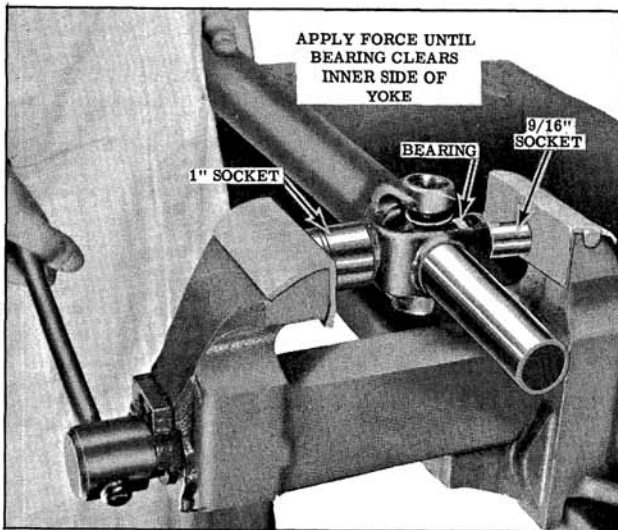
Pressing Bearing From Yoke (Spicer)
